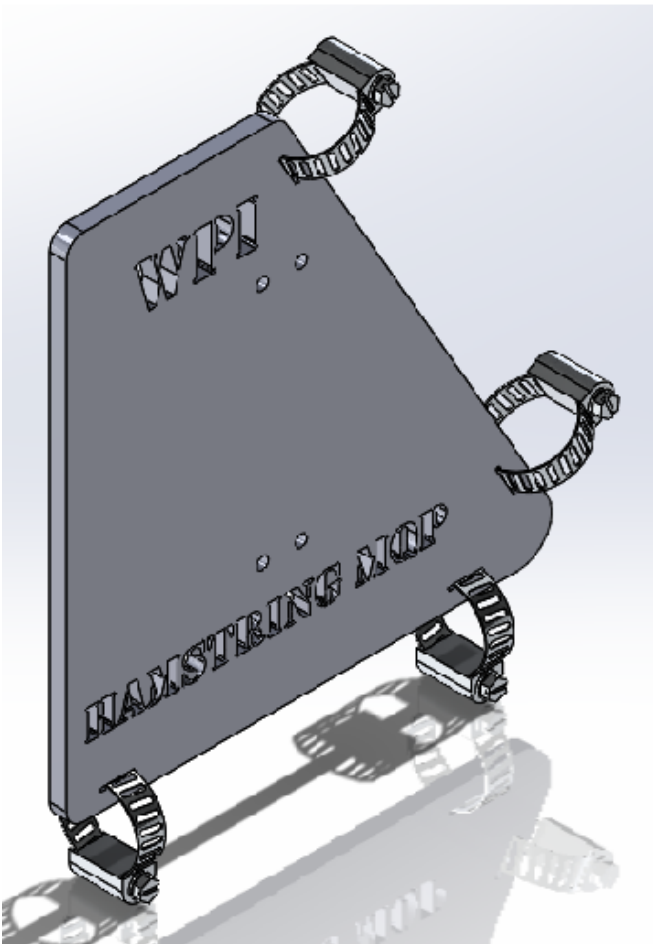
Part Model of Mounting Plate with Aircraft Clamps in Place
